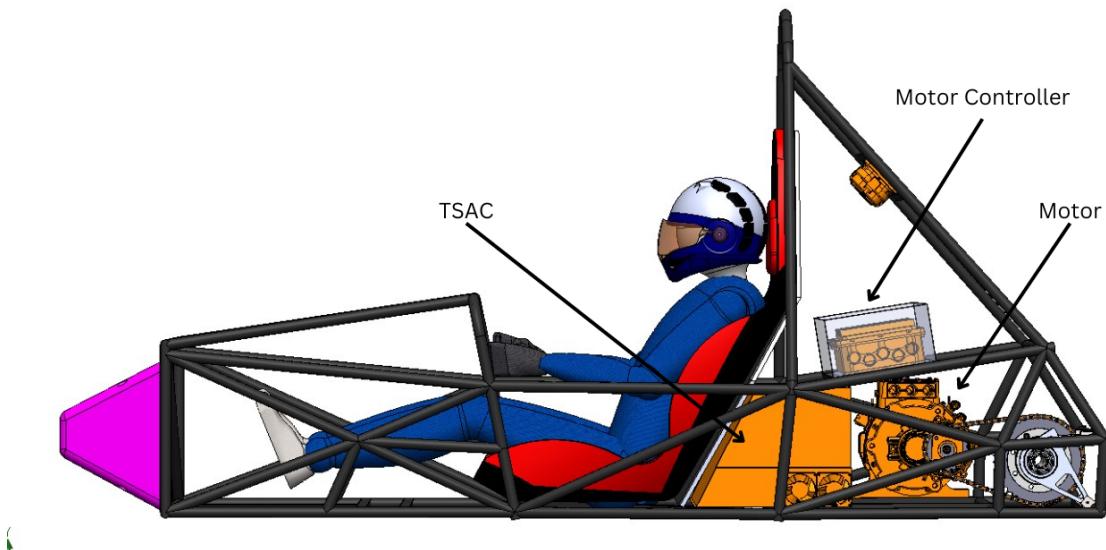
Accumulator, Motor and Motor Controller position in Chassis
